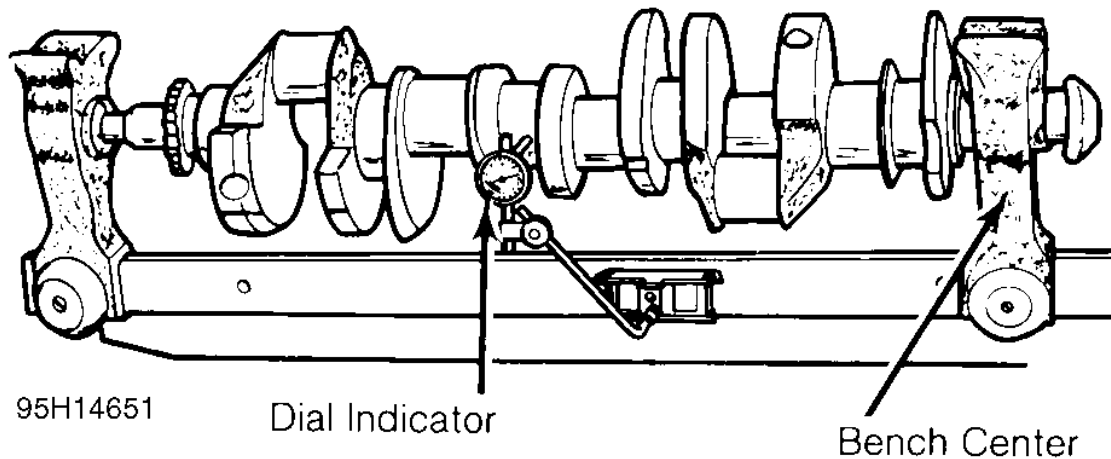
Measuring Crankshaft Main Bearing Journal Runout
